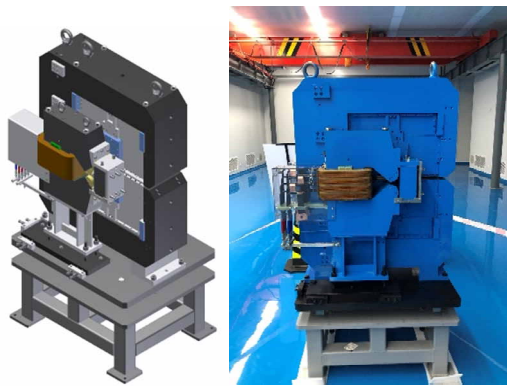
Well-assembled superbend magnet. The mechanical design is on the left and picture of real magnet is on the right.
